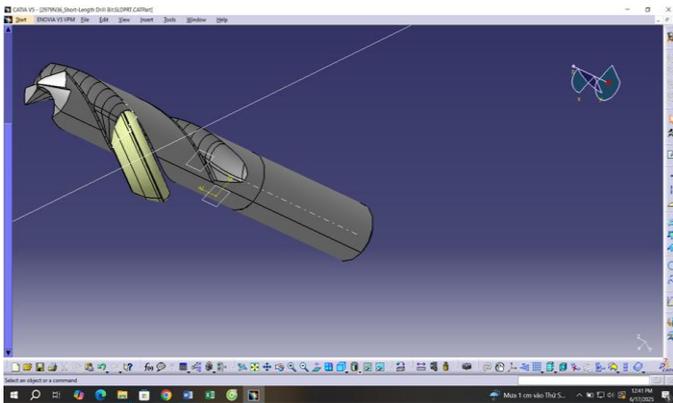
Grinding disk 3D surface was created in CATIA (D=25 mm)
